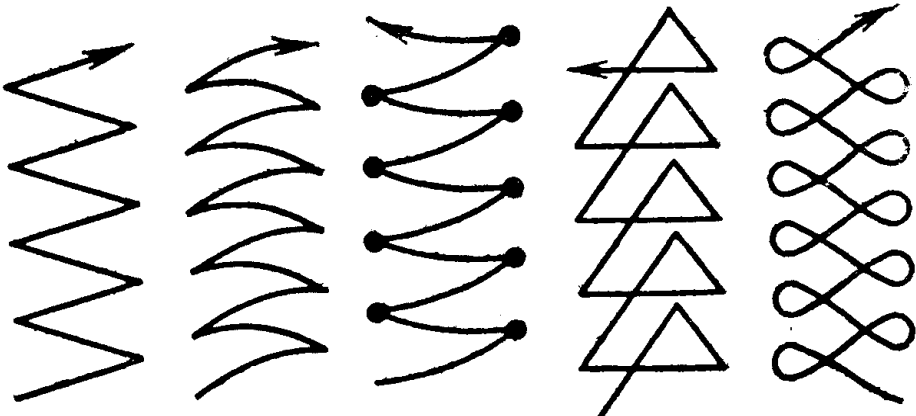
Trajectory of the electrode end during manual arc welding
